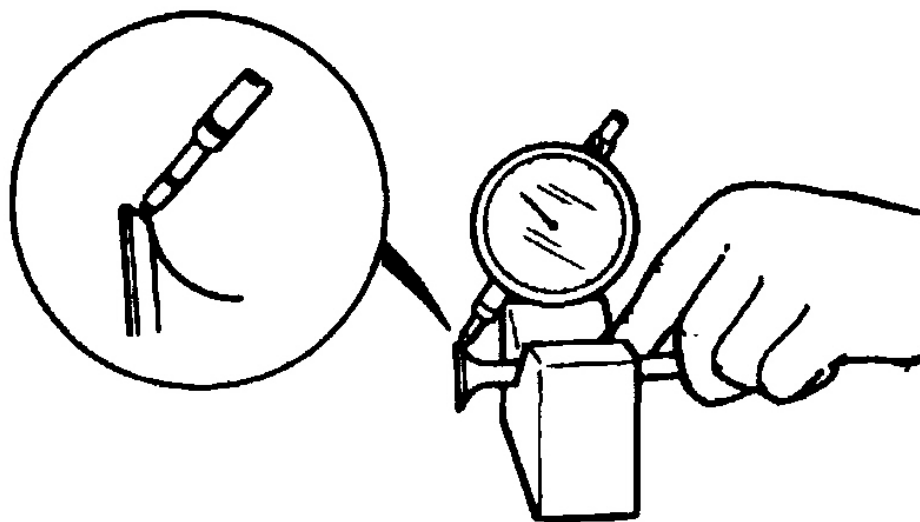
Inspecting Valve Stem End Face For Pitting And Wear
